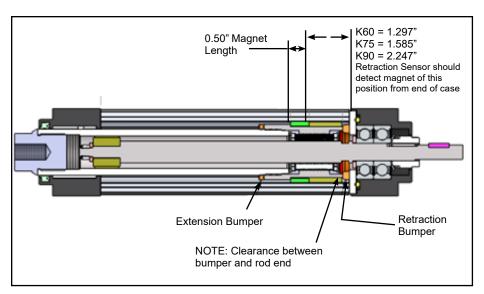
Actuator Shown in maximum recommended retract position, with 5 mm of clearance on retract impact bumper.
